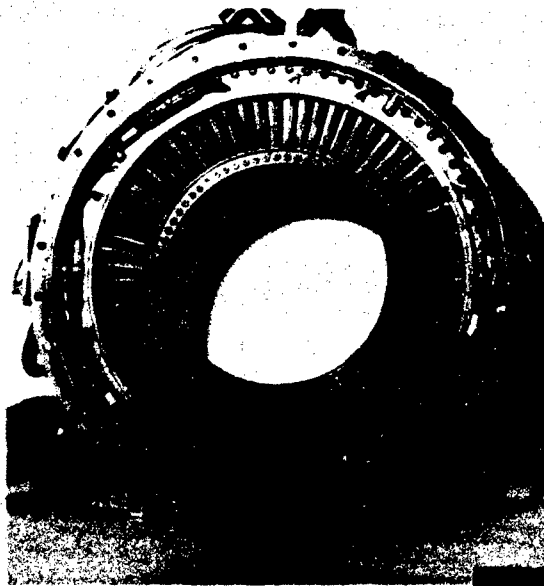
Build I, Full Rear View of First Rotor Assembly (XPN-18906)
